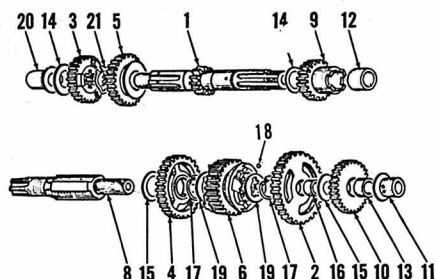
Exploded view of M31 three speed transmission. Bushing (11) has an open end, bushing (20) has a closed end.
